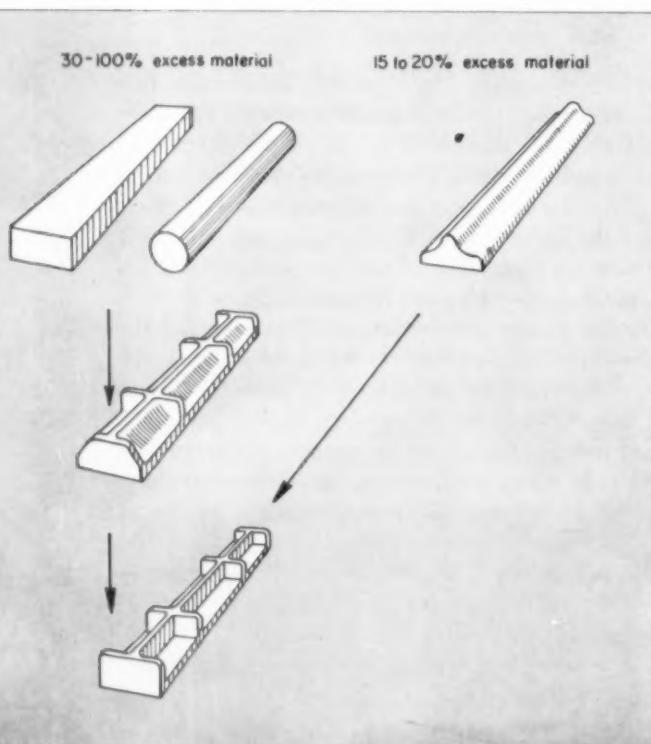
Conventional forging part at left requires 30 to 100-percent excess material in the forging stock and a preliminary forging operation. Pre-extruding stock at right eliminates one forging step and one set of forging dies while reducing material waste 15 to 85 percent.
